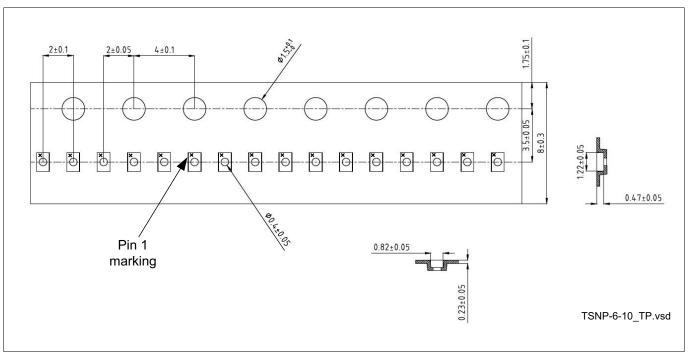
Tape & Reel Dimensions TSNP-6-10 (reel diameter 180 mm, pieces/reel 12000)
